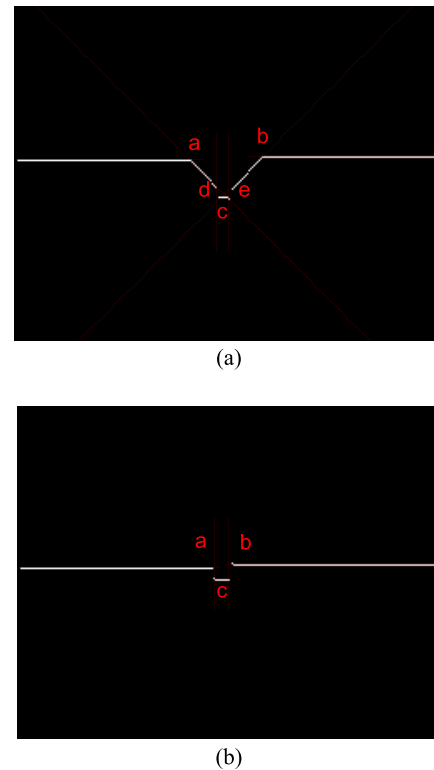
Results of line fitting to extract feature points. (a) Y-shape weld. (b) I-shape weld.
